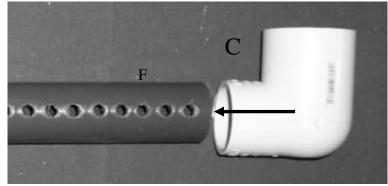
Assembly of the Medium/Large Wheelchair (Step 13).
